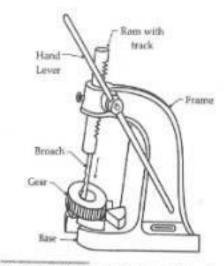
An Arbor Press Being used to broach a key way in a gear.
